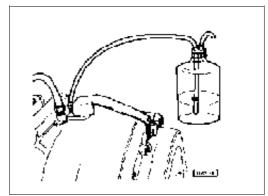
Bleeding the air from the front service brake hydraulic system.
